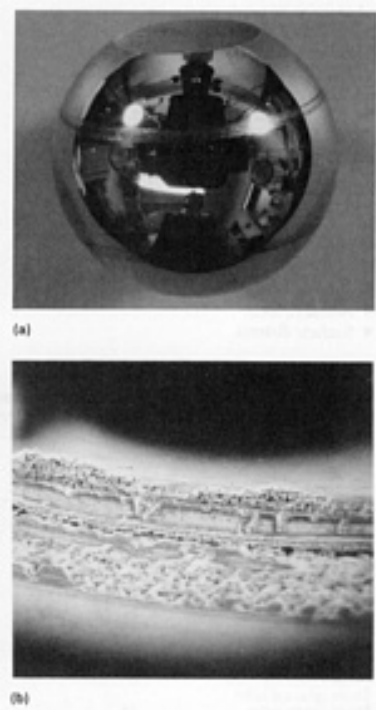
Pitting (surface distress) generated on a rolling-contact surface. (a) Ball used in V-groove testing machine. (b) Pit produced on ball. 28×
